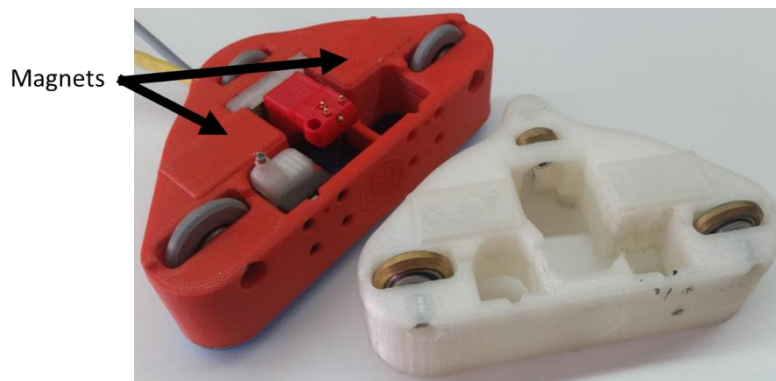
Preliminary device chassis with bearing tin wheels on the right and bearing 3D printed on the left.
